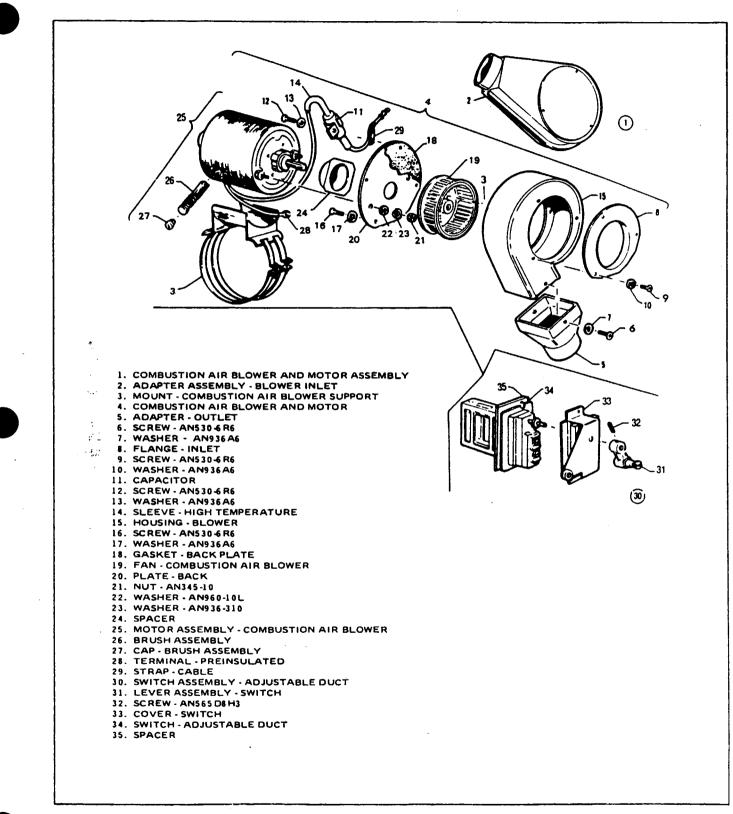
Exploded View - Combustion Air Blower and Motor Assembly (30,000 BTU)
